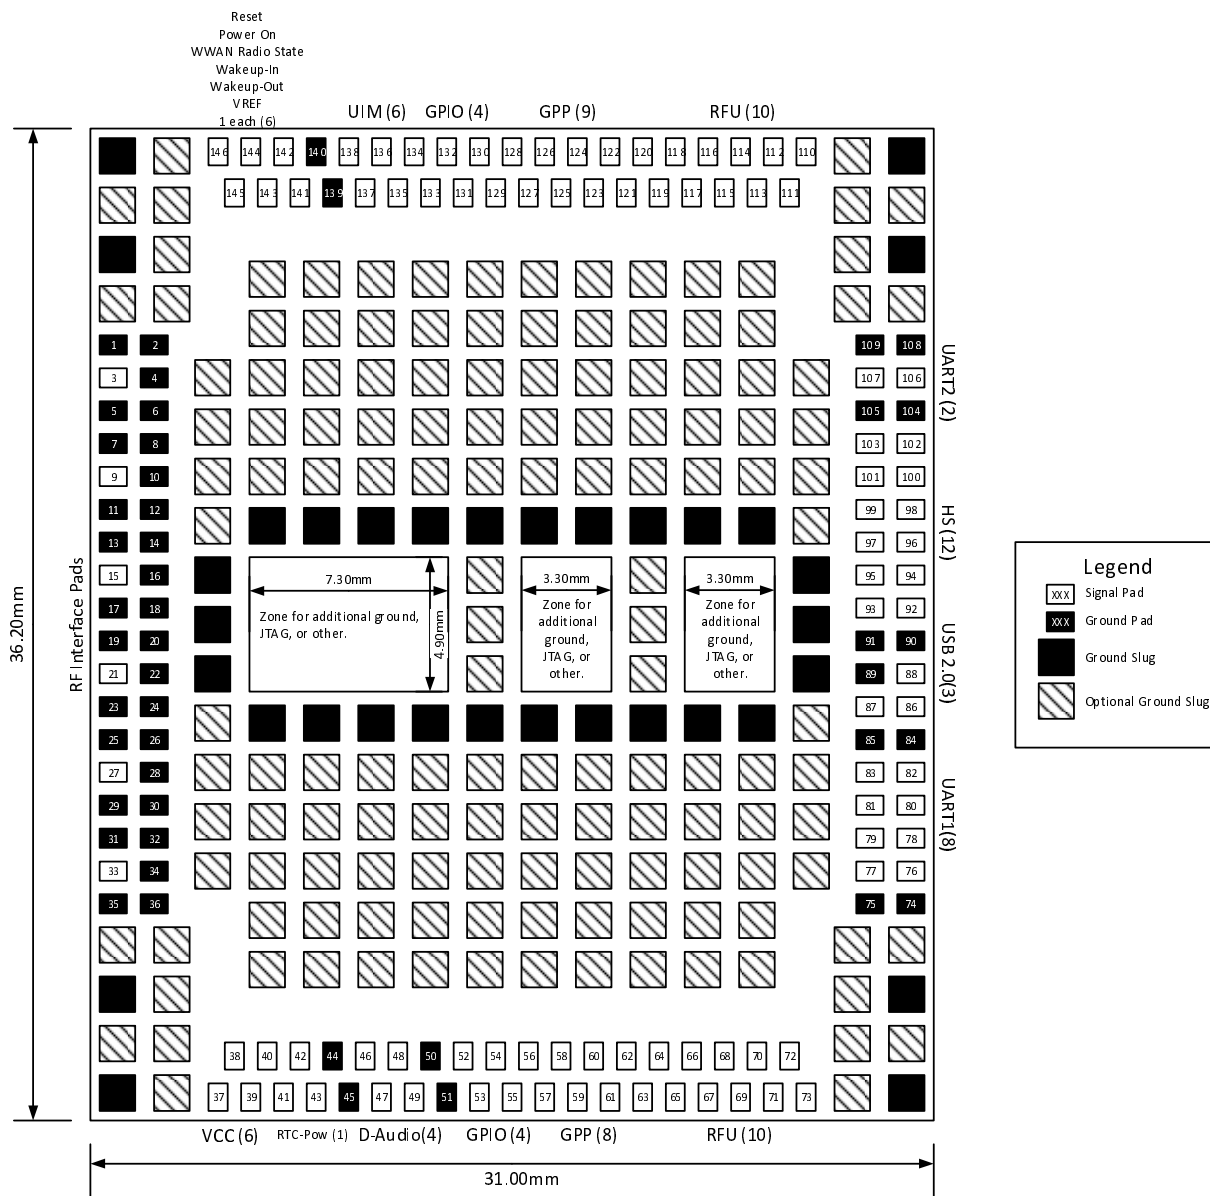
SMT3136 physical form factor (1 122 mm<sup>2</sup>), dimensions, pad numbering and placement
